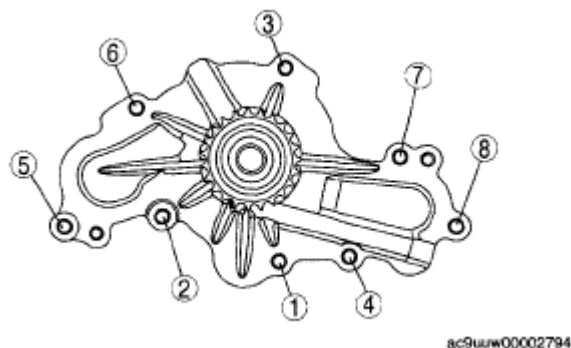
Identifying Water Pump Bolts Tighten Sequence
